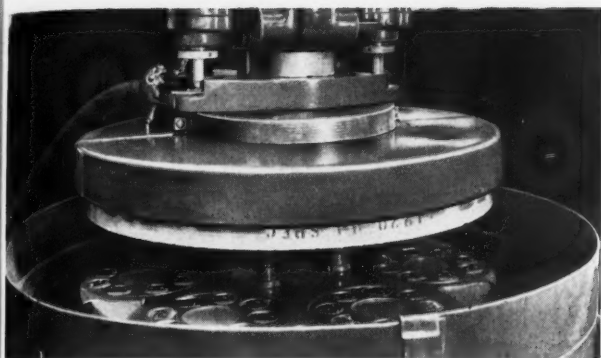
The perfect surface and accuracy required on the valve plates is obtained by lapping them in a Norton Hypo lapping machine.
